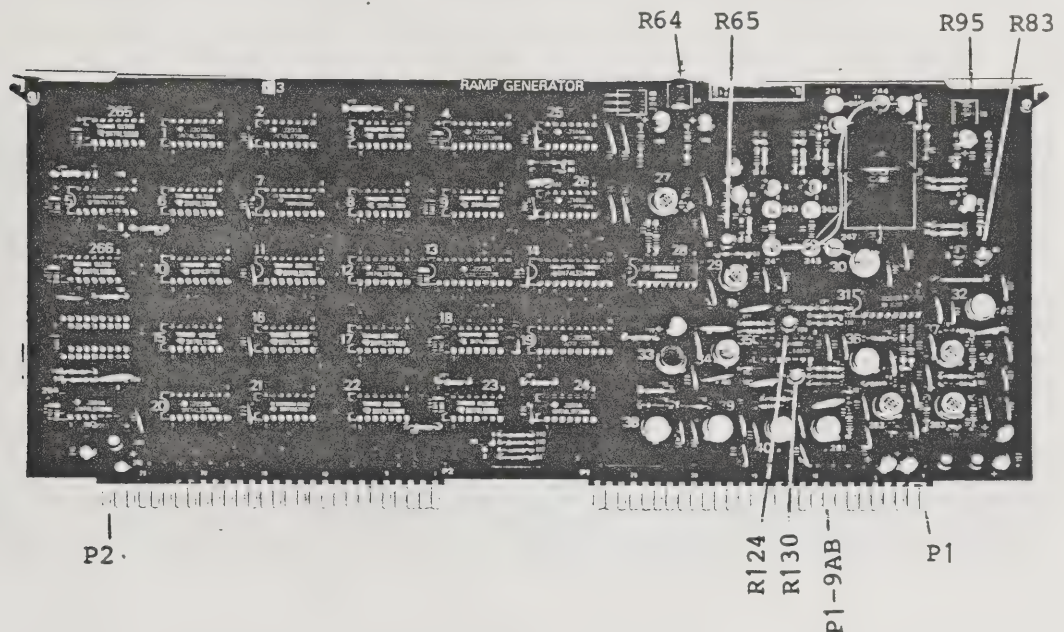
Adjustments on the ramp generator board (BGP-010185)
